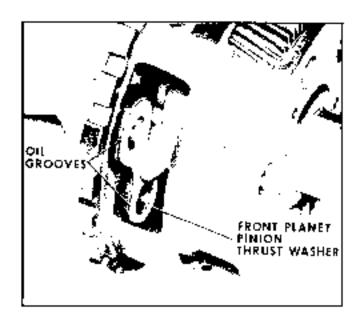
F-66 Installing Long Pinion Front Throst Washer.
